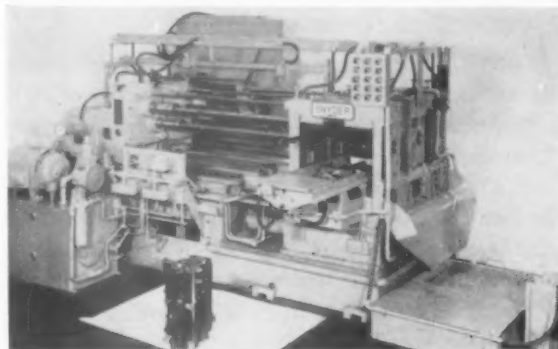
Five-station transfer-type boring machine used by Peugeot for mirror-finishing cylinder blocks.
